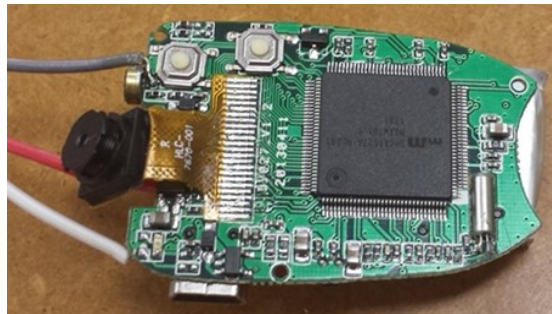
Camera PCB. This circuit was extracted from a key fob.
